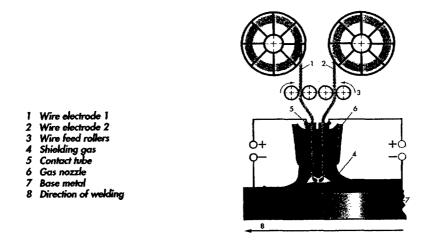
Metal Active Gas Tandem Welding (MAG Tandem Welding)
